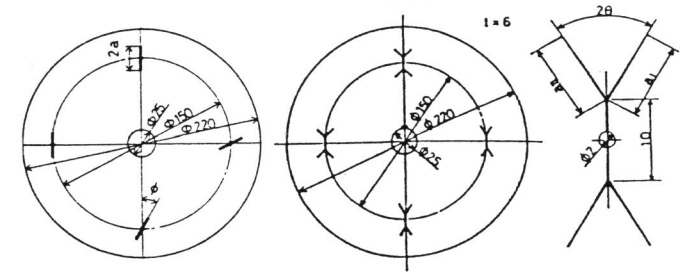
Model of the rotating disks (Single cracks and Branched cracks)
